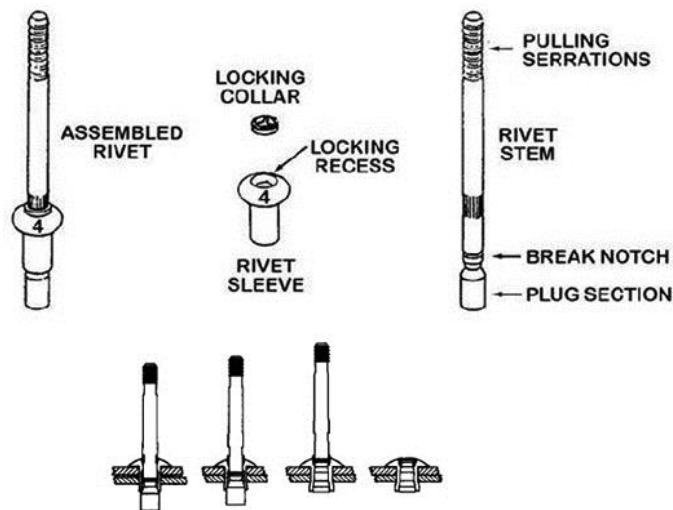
Standard-type mechanical-lock blind rivet (Cherrylock).
